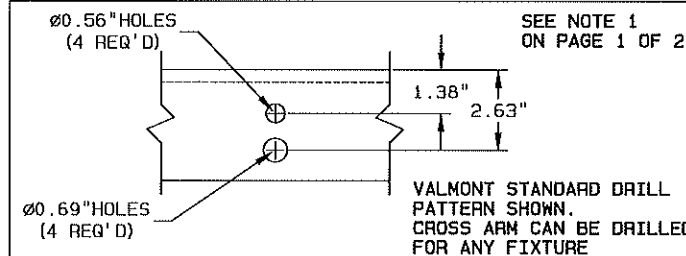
ANGLE ARM-(ACR3) - SEE NOTE 1
